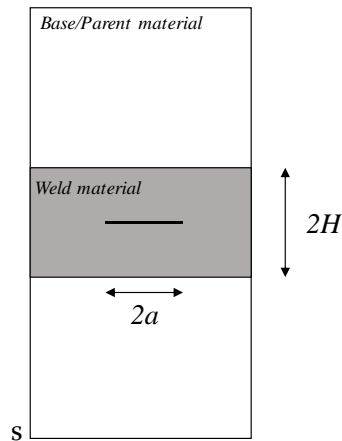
Idealized weldment geometry consisting of two materials, weld and base, as proposed by BS7910
